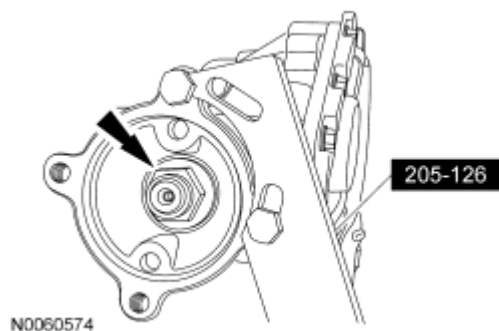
Holding Output Pinion Flange Using Special Tool (205-126)
